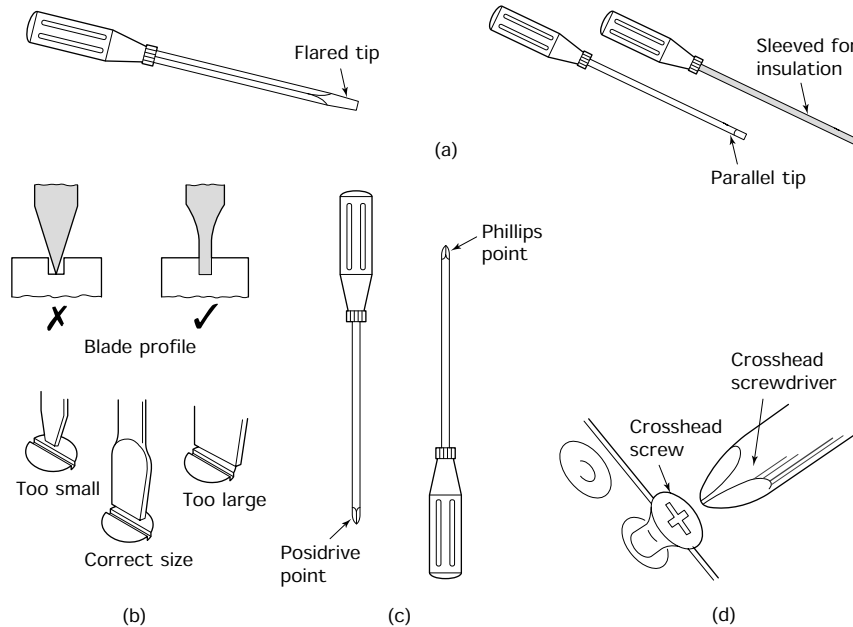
Screwdrivers: (a) types of flat blade screwdriver; (b) correct selection of screwdriver blade; (c) types of crosshead screwdriver; (d) the correct size and type of crosshead screwdriver must always be used for crosshead (recessed head) screws
